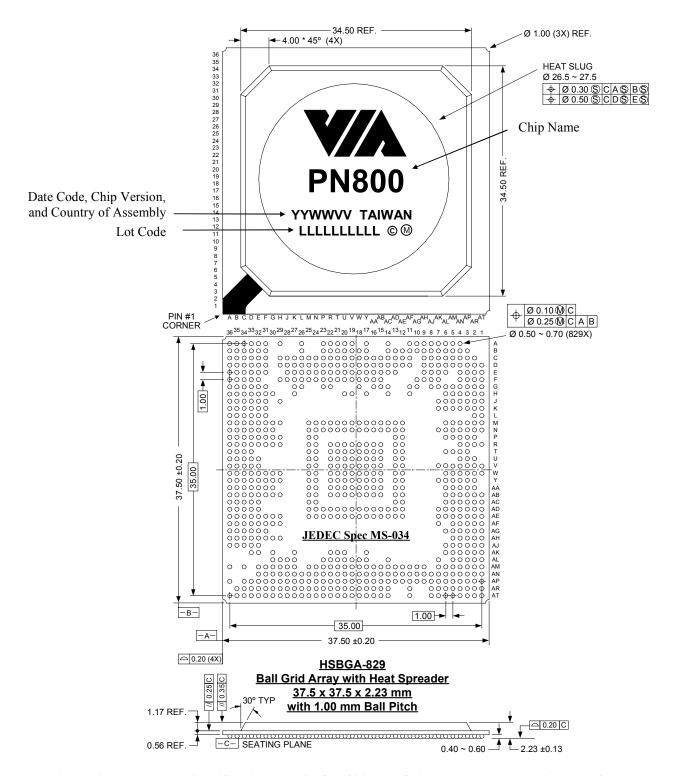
Mechanical Specifications – HSBGA-829 Ball Grid Array Package with Heat Spreader
